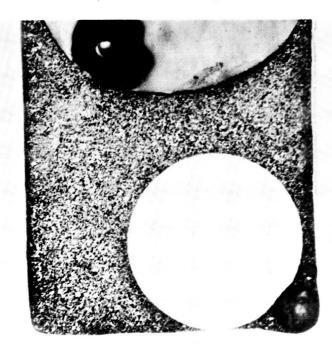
Solder joint 1.5.89; resistor lead to solder coated bifurcated terminal; sterilized; 100x magnification; potassium dichromate etch (02365).
